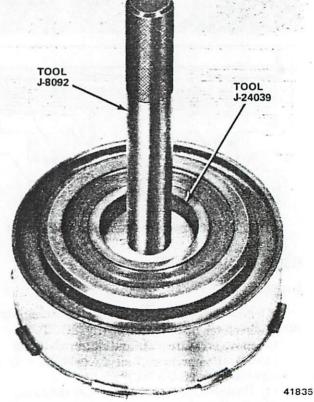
C-74 Front Clutch Retainer Bushing Removal—Model 727
